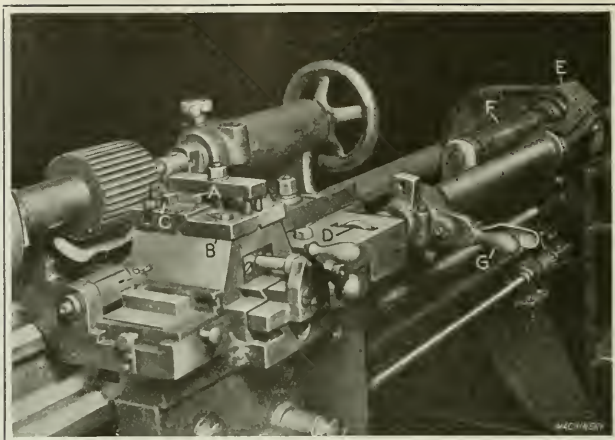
Milling the Threads in the End of Chaser Blanks, using Special Machine and Tapered Milling Cutter
